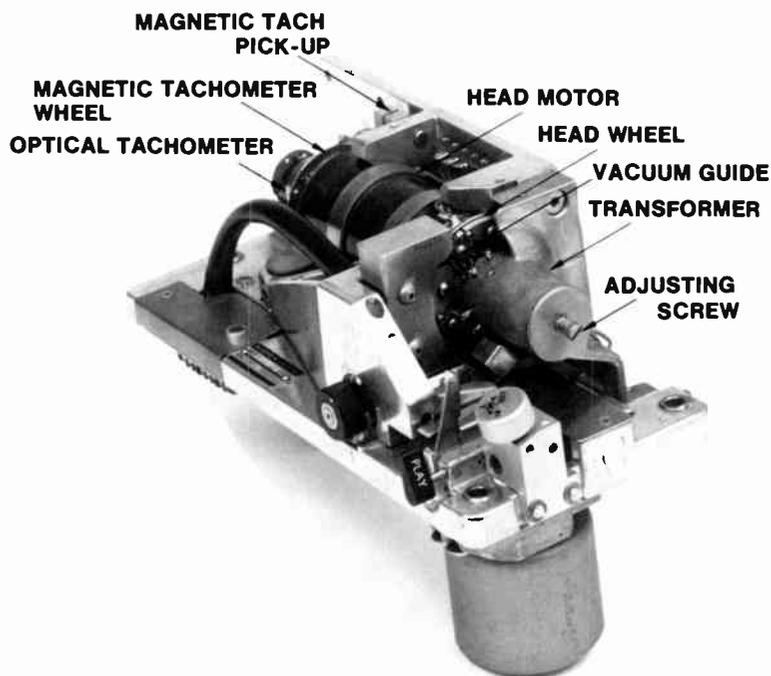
Ampex Mk XV Video Head Wheel Panel
